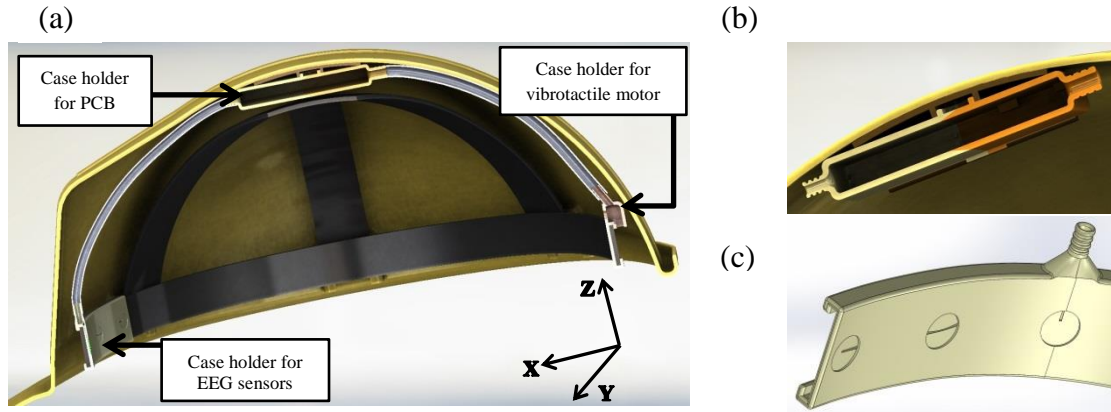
(a) sectional drawing of the helmet (b) electric board slot on top of the inside helmet. (c) slots for EEG sensors
